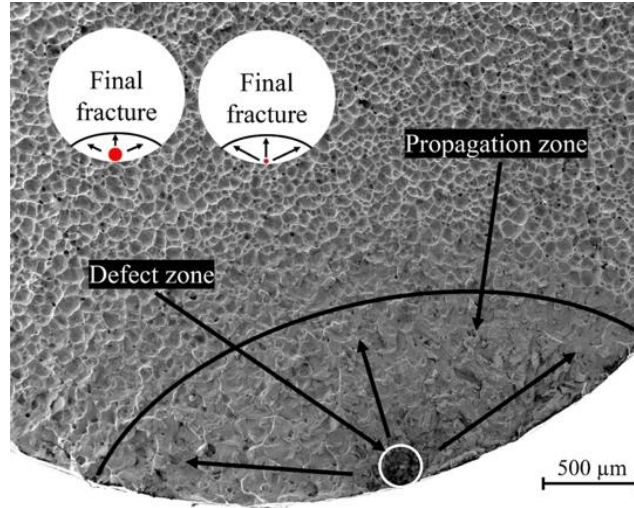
Fracture surface of a specimen from batch 2 (P180) showing the defect, fatigue crack propagation and final fracture zones; the insets illustrate fatigue samples where cracks initiated from either a large or a small defect
